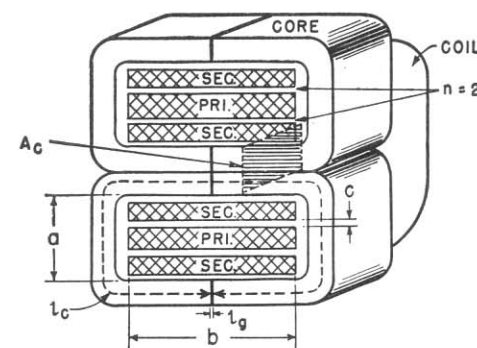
Dimensions and coil section of anode transformer. Construction shown is for shell-type transformer with 2 Hipersil cores.
